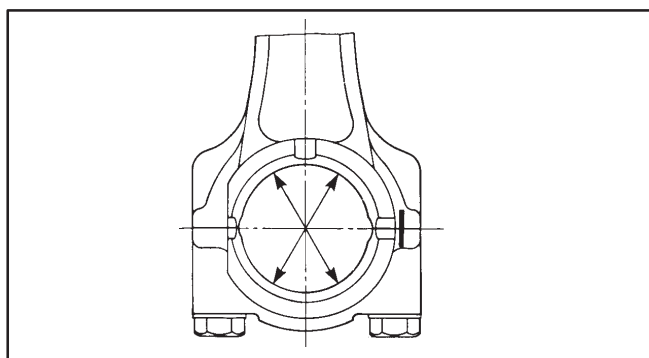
MEASURING CONNECTING ROD CRANK BORE
